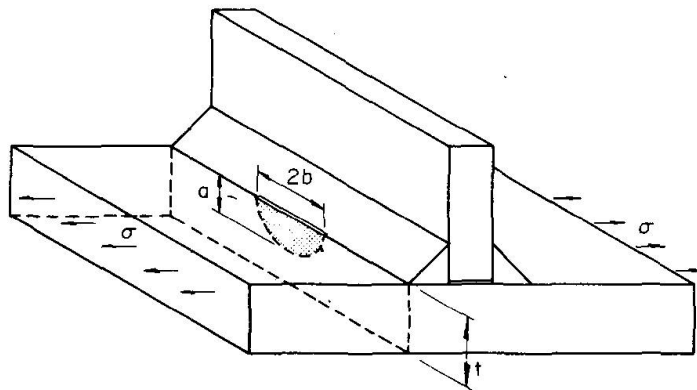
Part-through Crack at the Toe of a Non-load Carrying Fillet Weld.
